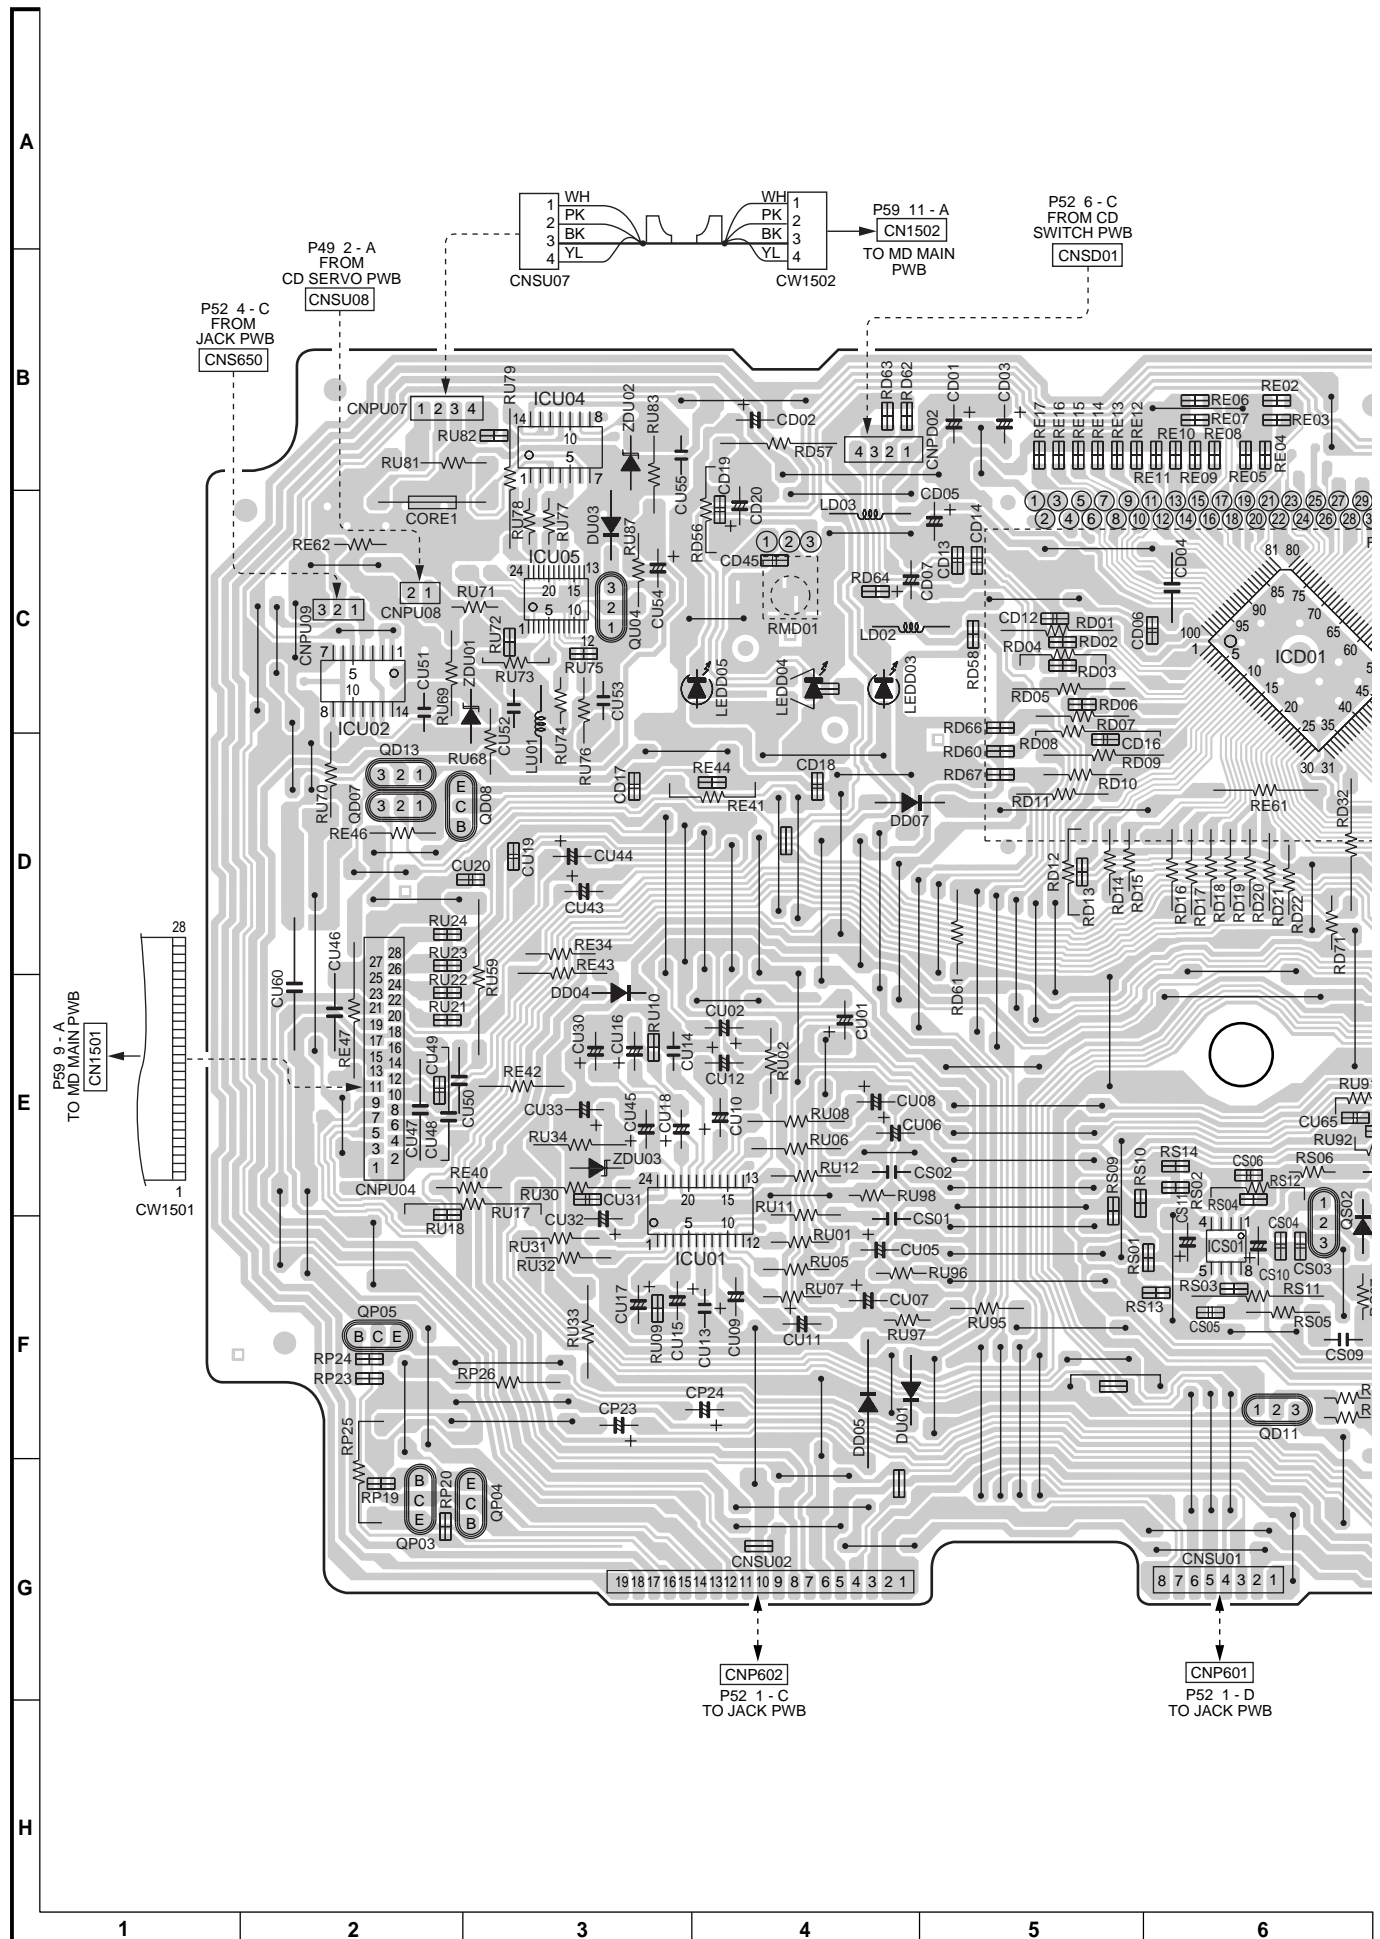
WIRING SIDE OF P.W.BOARD (2/11)
